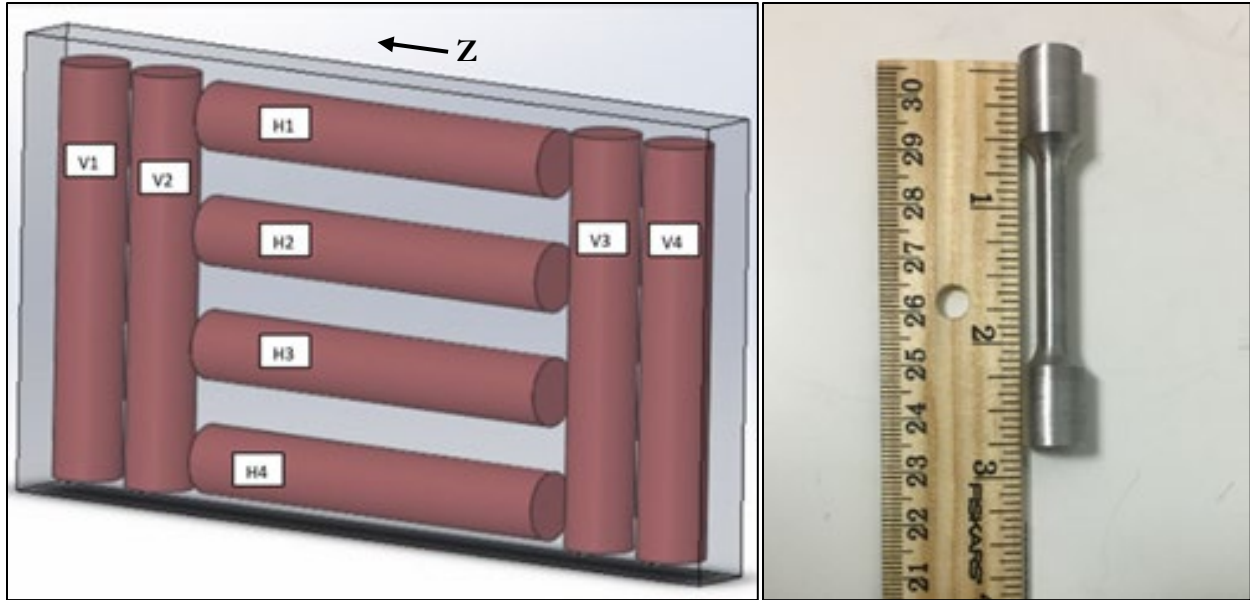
Left: Schematic of tensile bar orientation machined from one wall piece. Right: Photograph of a representative machined tensile test bar.
